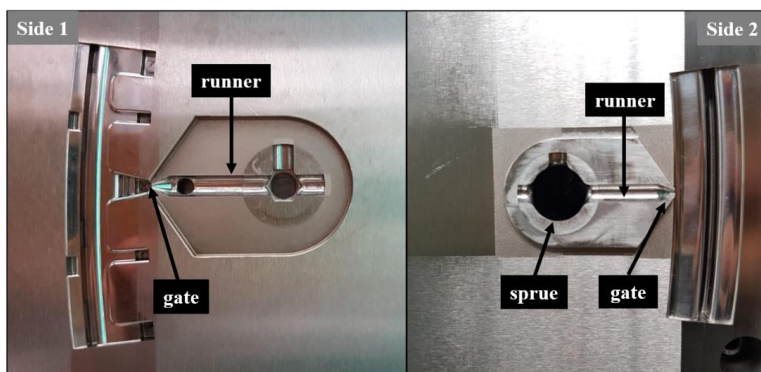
6: Mold for the production of retaining plates, made available by Schunk Sintermetalltechnik GmbH and Rolls Royce.
